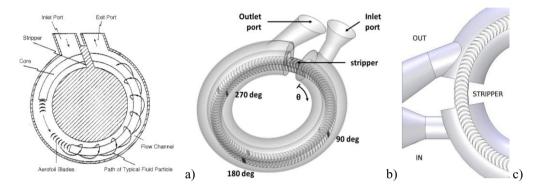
(a) Axial view of an RFC with airfoil blading [8]; (b) Fluid model of the present RFC; (c) Detail view of the stripper.
